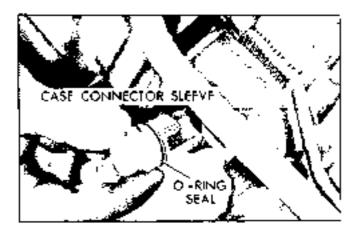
F=24 Removing Cosa Connector Sleeve and O-Ring Seat
